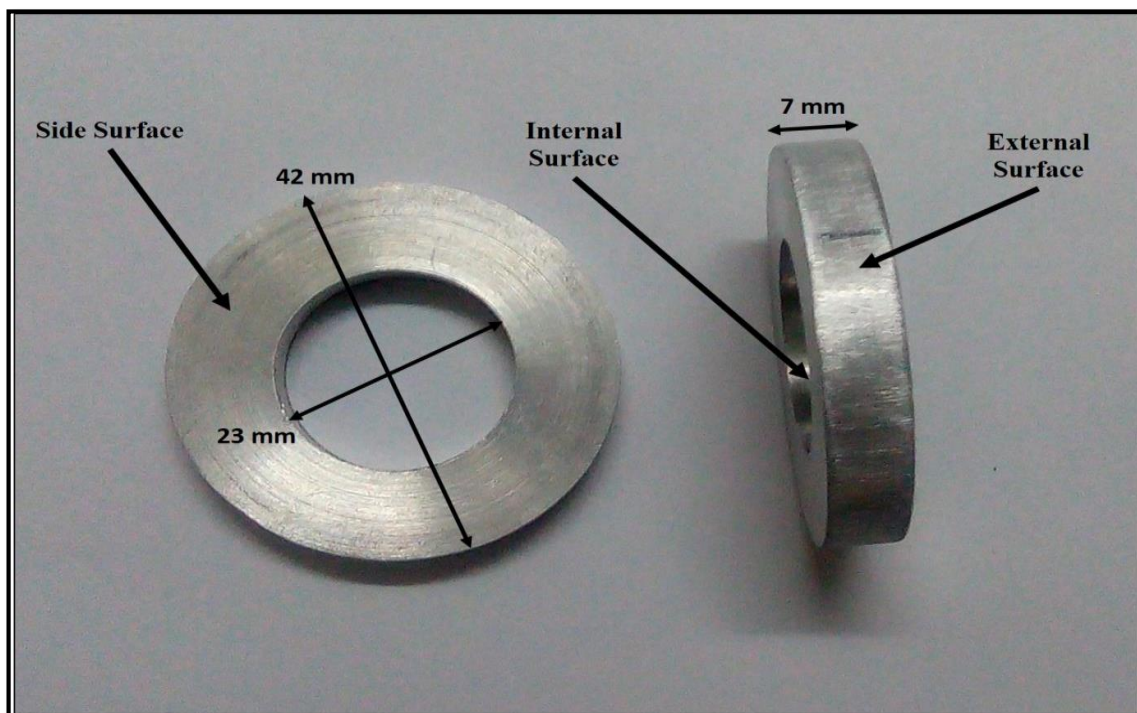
Dimension and shape of aluminium alloy workpiece
